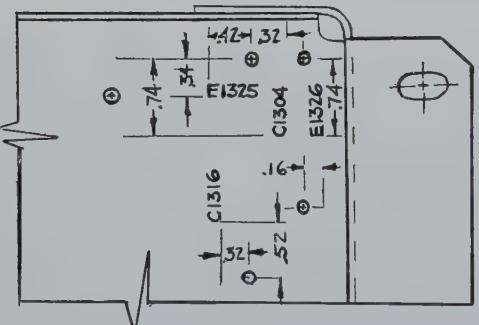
Partial view of a typical chassis marking drawing using conventional drafting techniques.
